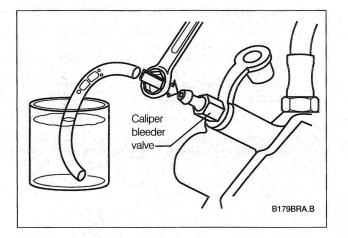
Container (partially filled with brake fluid) connected to caliper bleeder valve with clear tubing for bleeding brakes. Bleeding rear drum brake wheel cylinder is similar.
